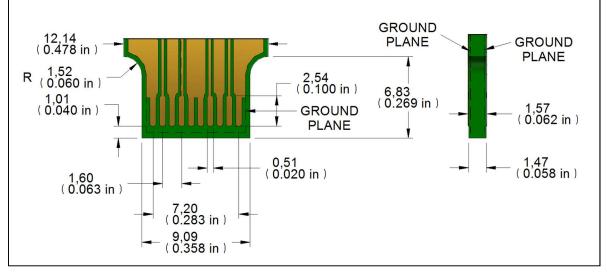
Example balunless fixture PCB paddle card interface mating dimensions
